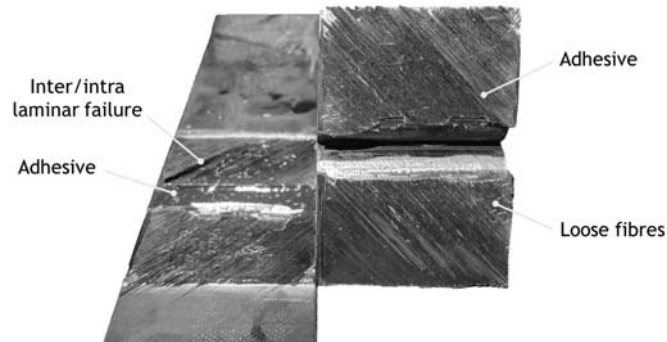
Typical fracture surface of type III failure sequence.
